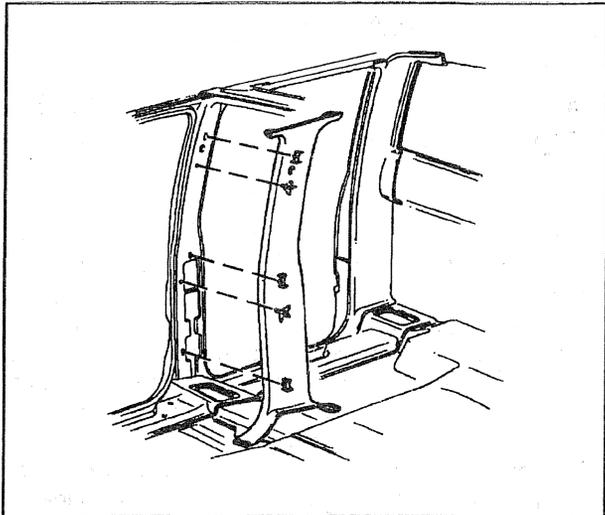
Front Side Door Lock Pillar Garnish Molding (Crew Cab)
